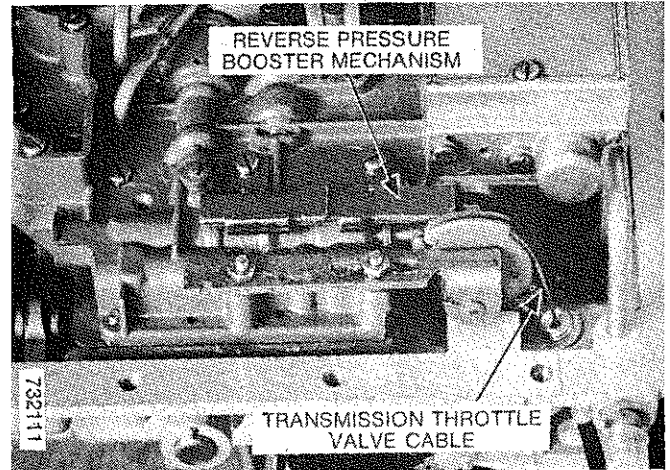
Throttle pressure cam and reverse pressure booster mechanism
